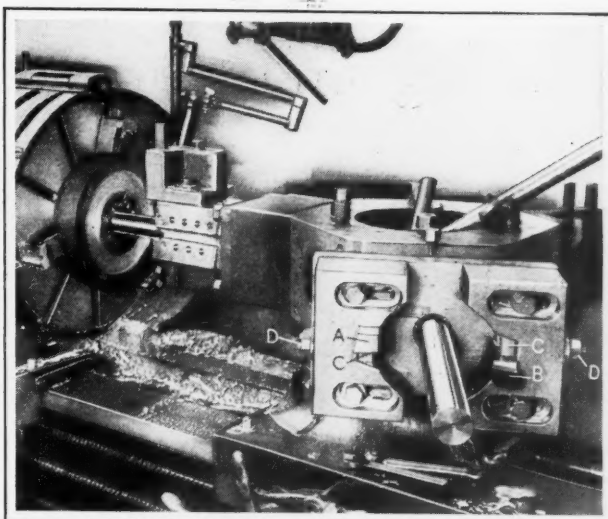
Turret Lathe Tool for Finishing the Groove in the Side of a Gear Blank in One Operation
